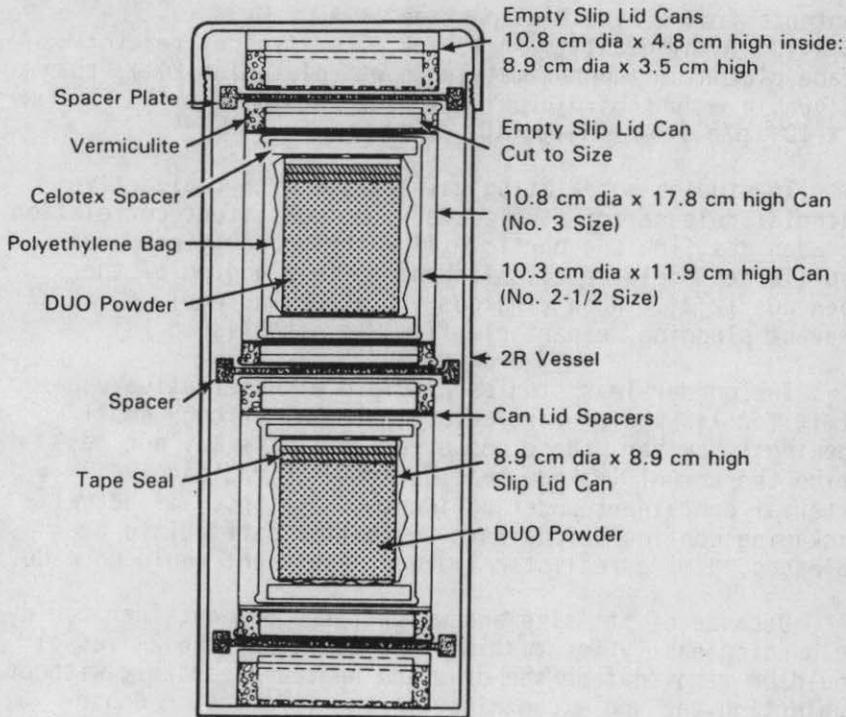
Packaging configuration for DUO powder inside a 6M container.
